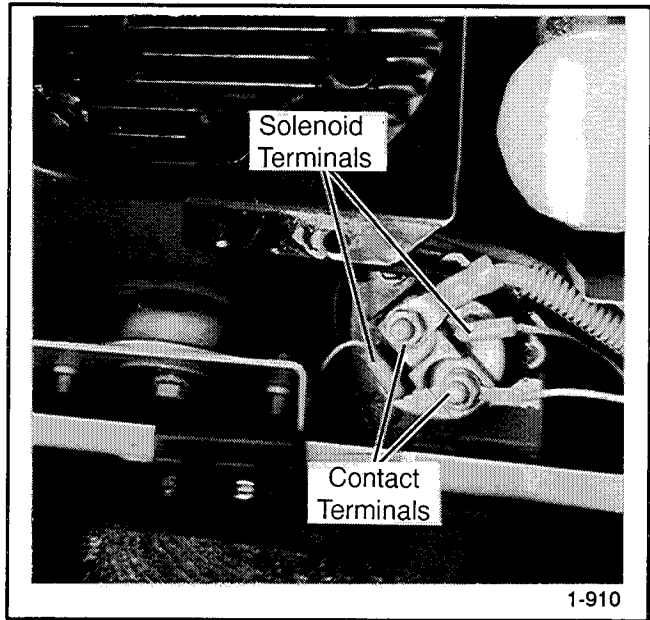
Engine/Generator Set Component Testing with Ohmmeter
